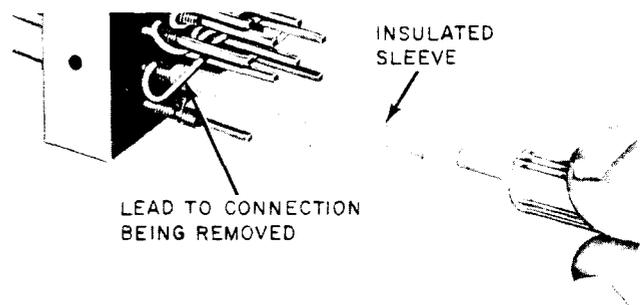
Removing Solderless-Wrapped Connections Using KS-20827 Wire-Unwrapping Tool
